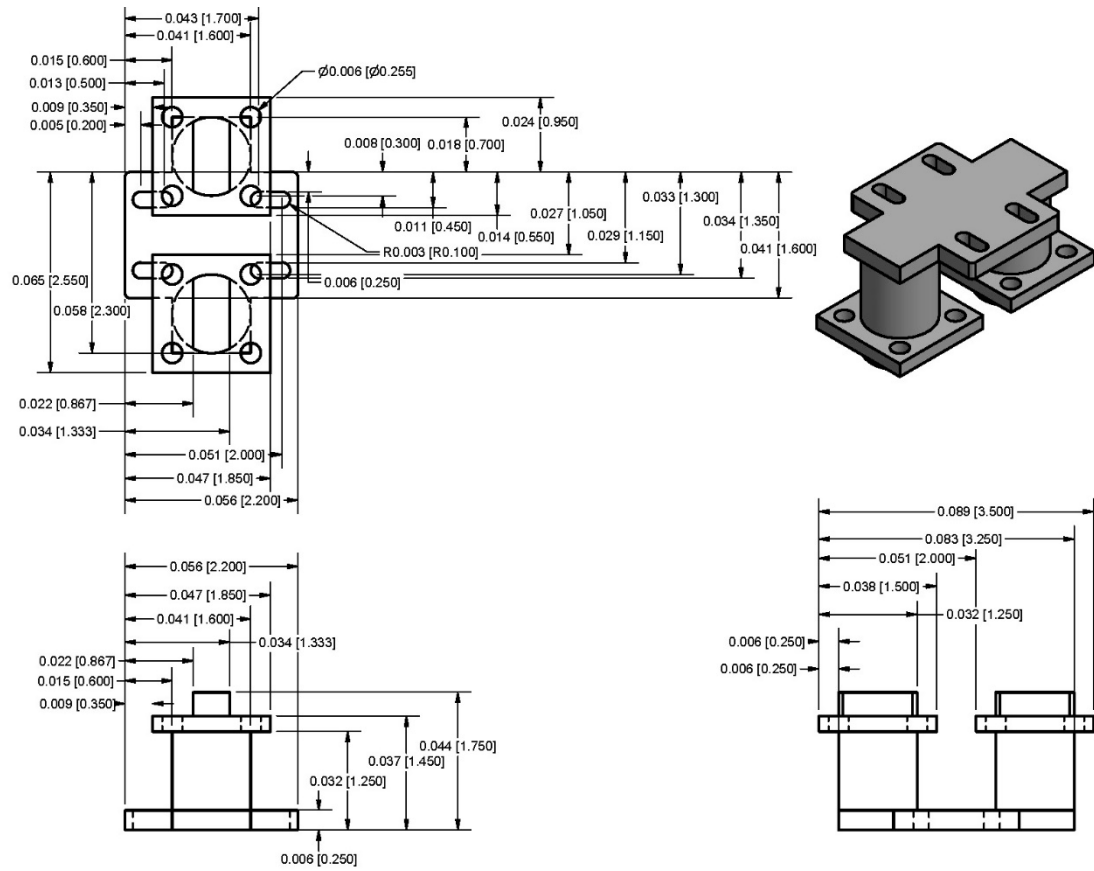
Lower part of the belt mount to transfer the force from timing belt to the carriage assembly.
